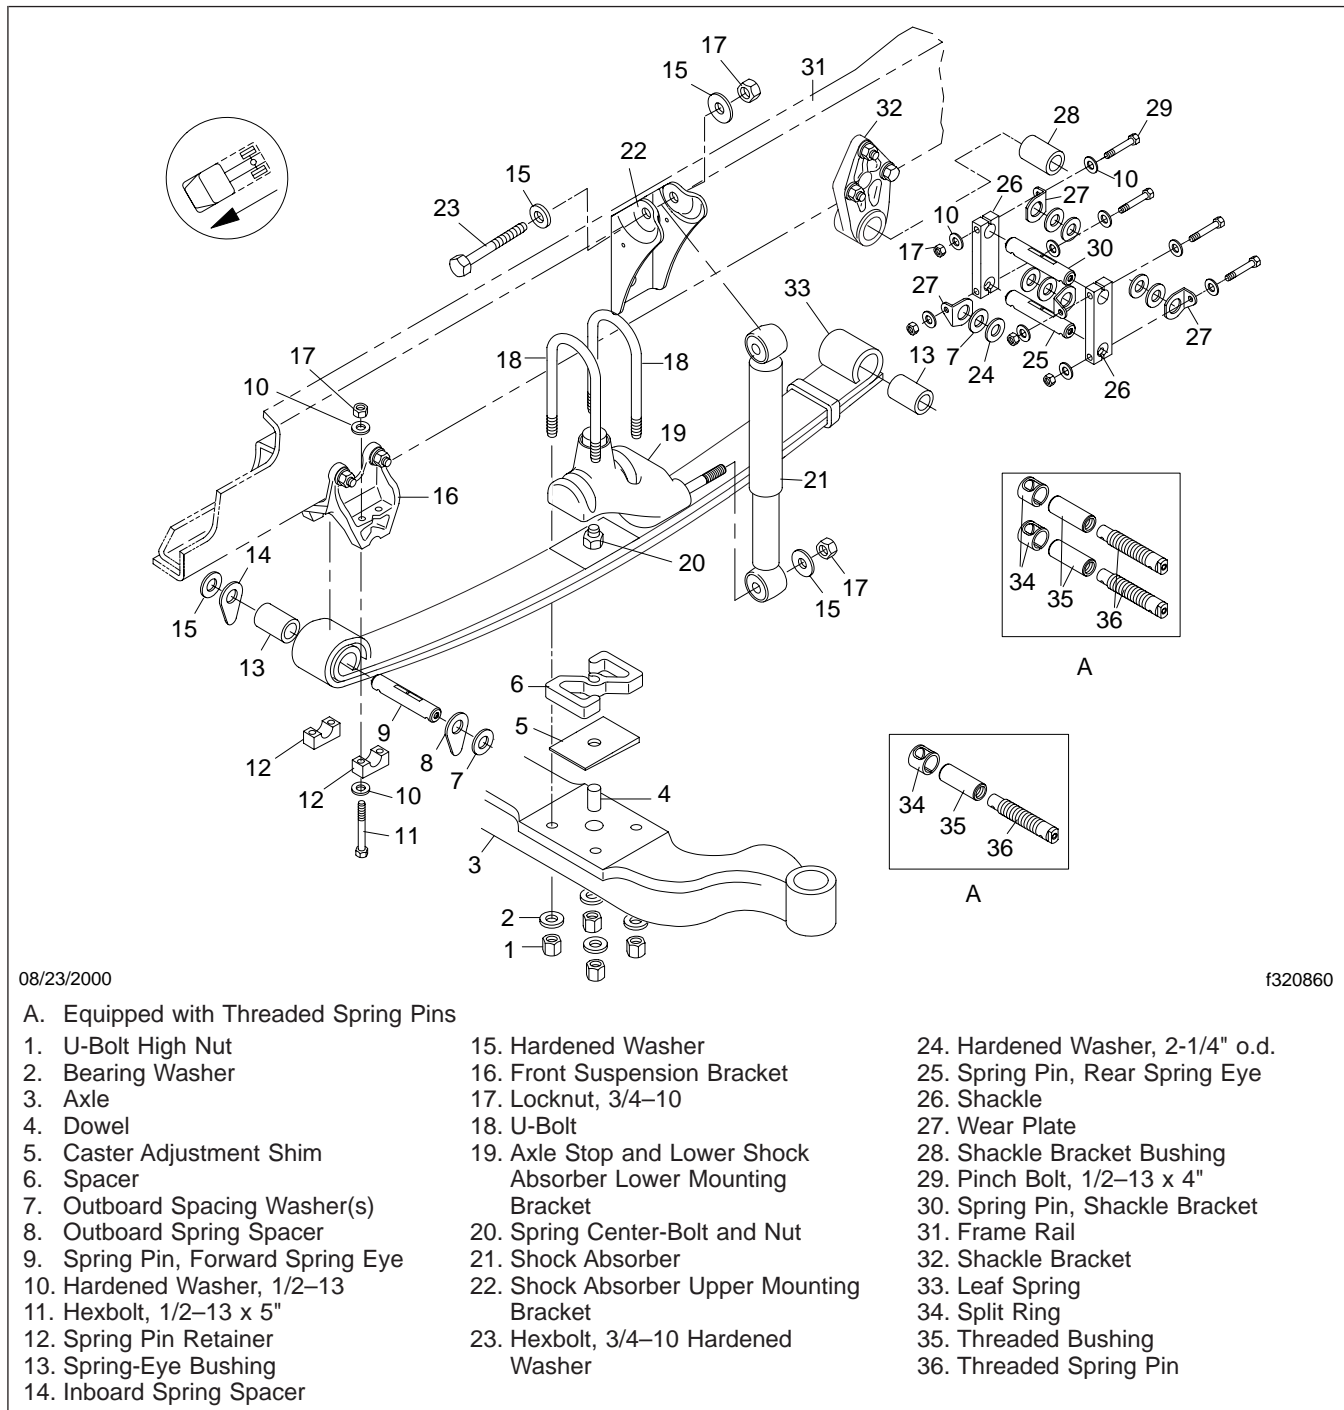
, Front Suspension with Bronze Bushings or Threaded Spring Pins
